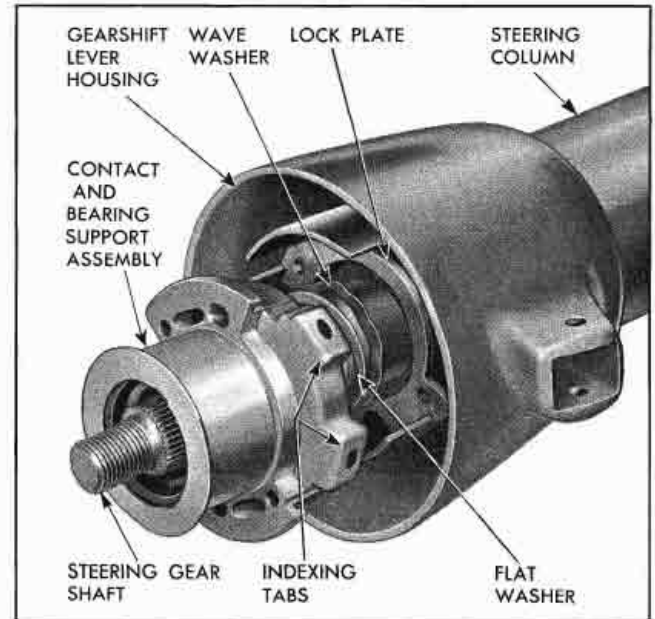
Bearing Support Assembly and Gearshift Lever Housing
